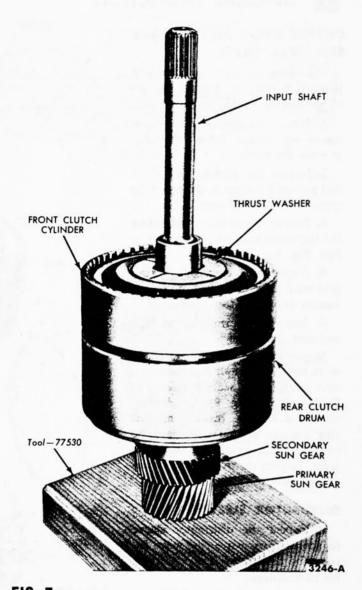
Input Shaft, Clutches and Primary Sun Gear
